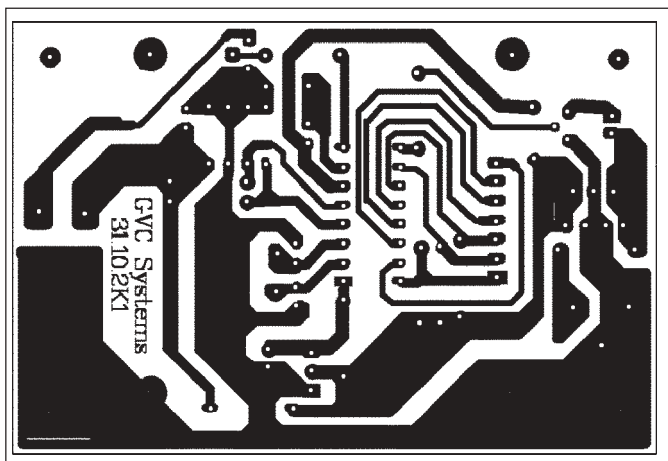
Actual-size, single-side PCB for the access-control system without keypad (Main PCB)
